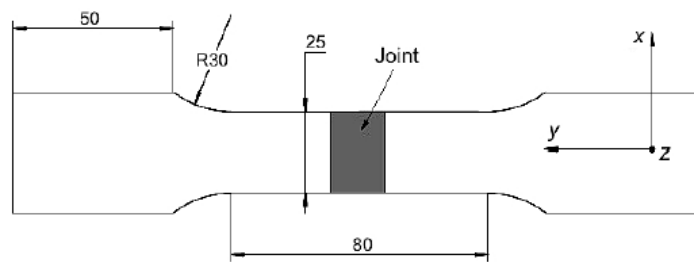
Tensile specimen dimension used in the investigation [70]
